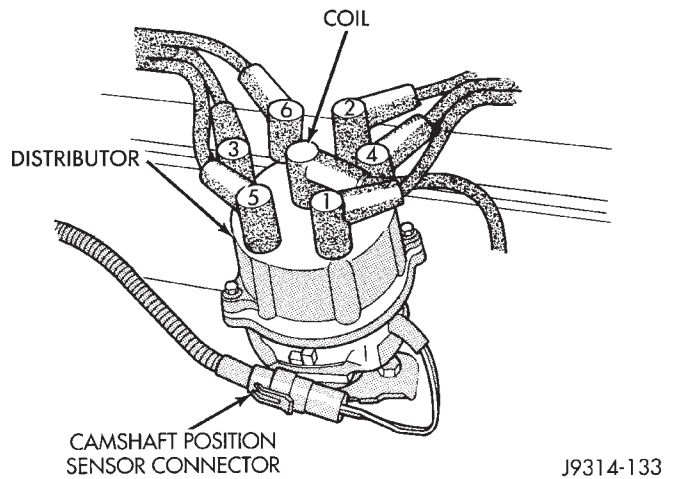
Distributor Cap, Spark Plug Cables and Camshaft Position Sensor Connector
